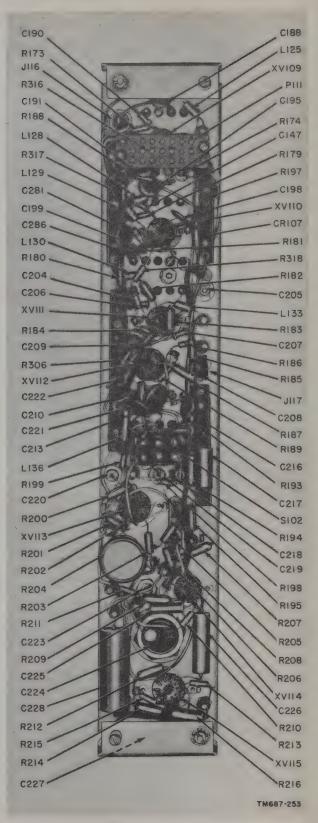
Limiter-discriminator-afc plug-in assembly, bottom view.
